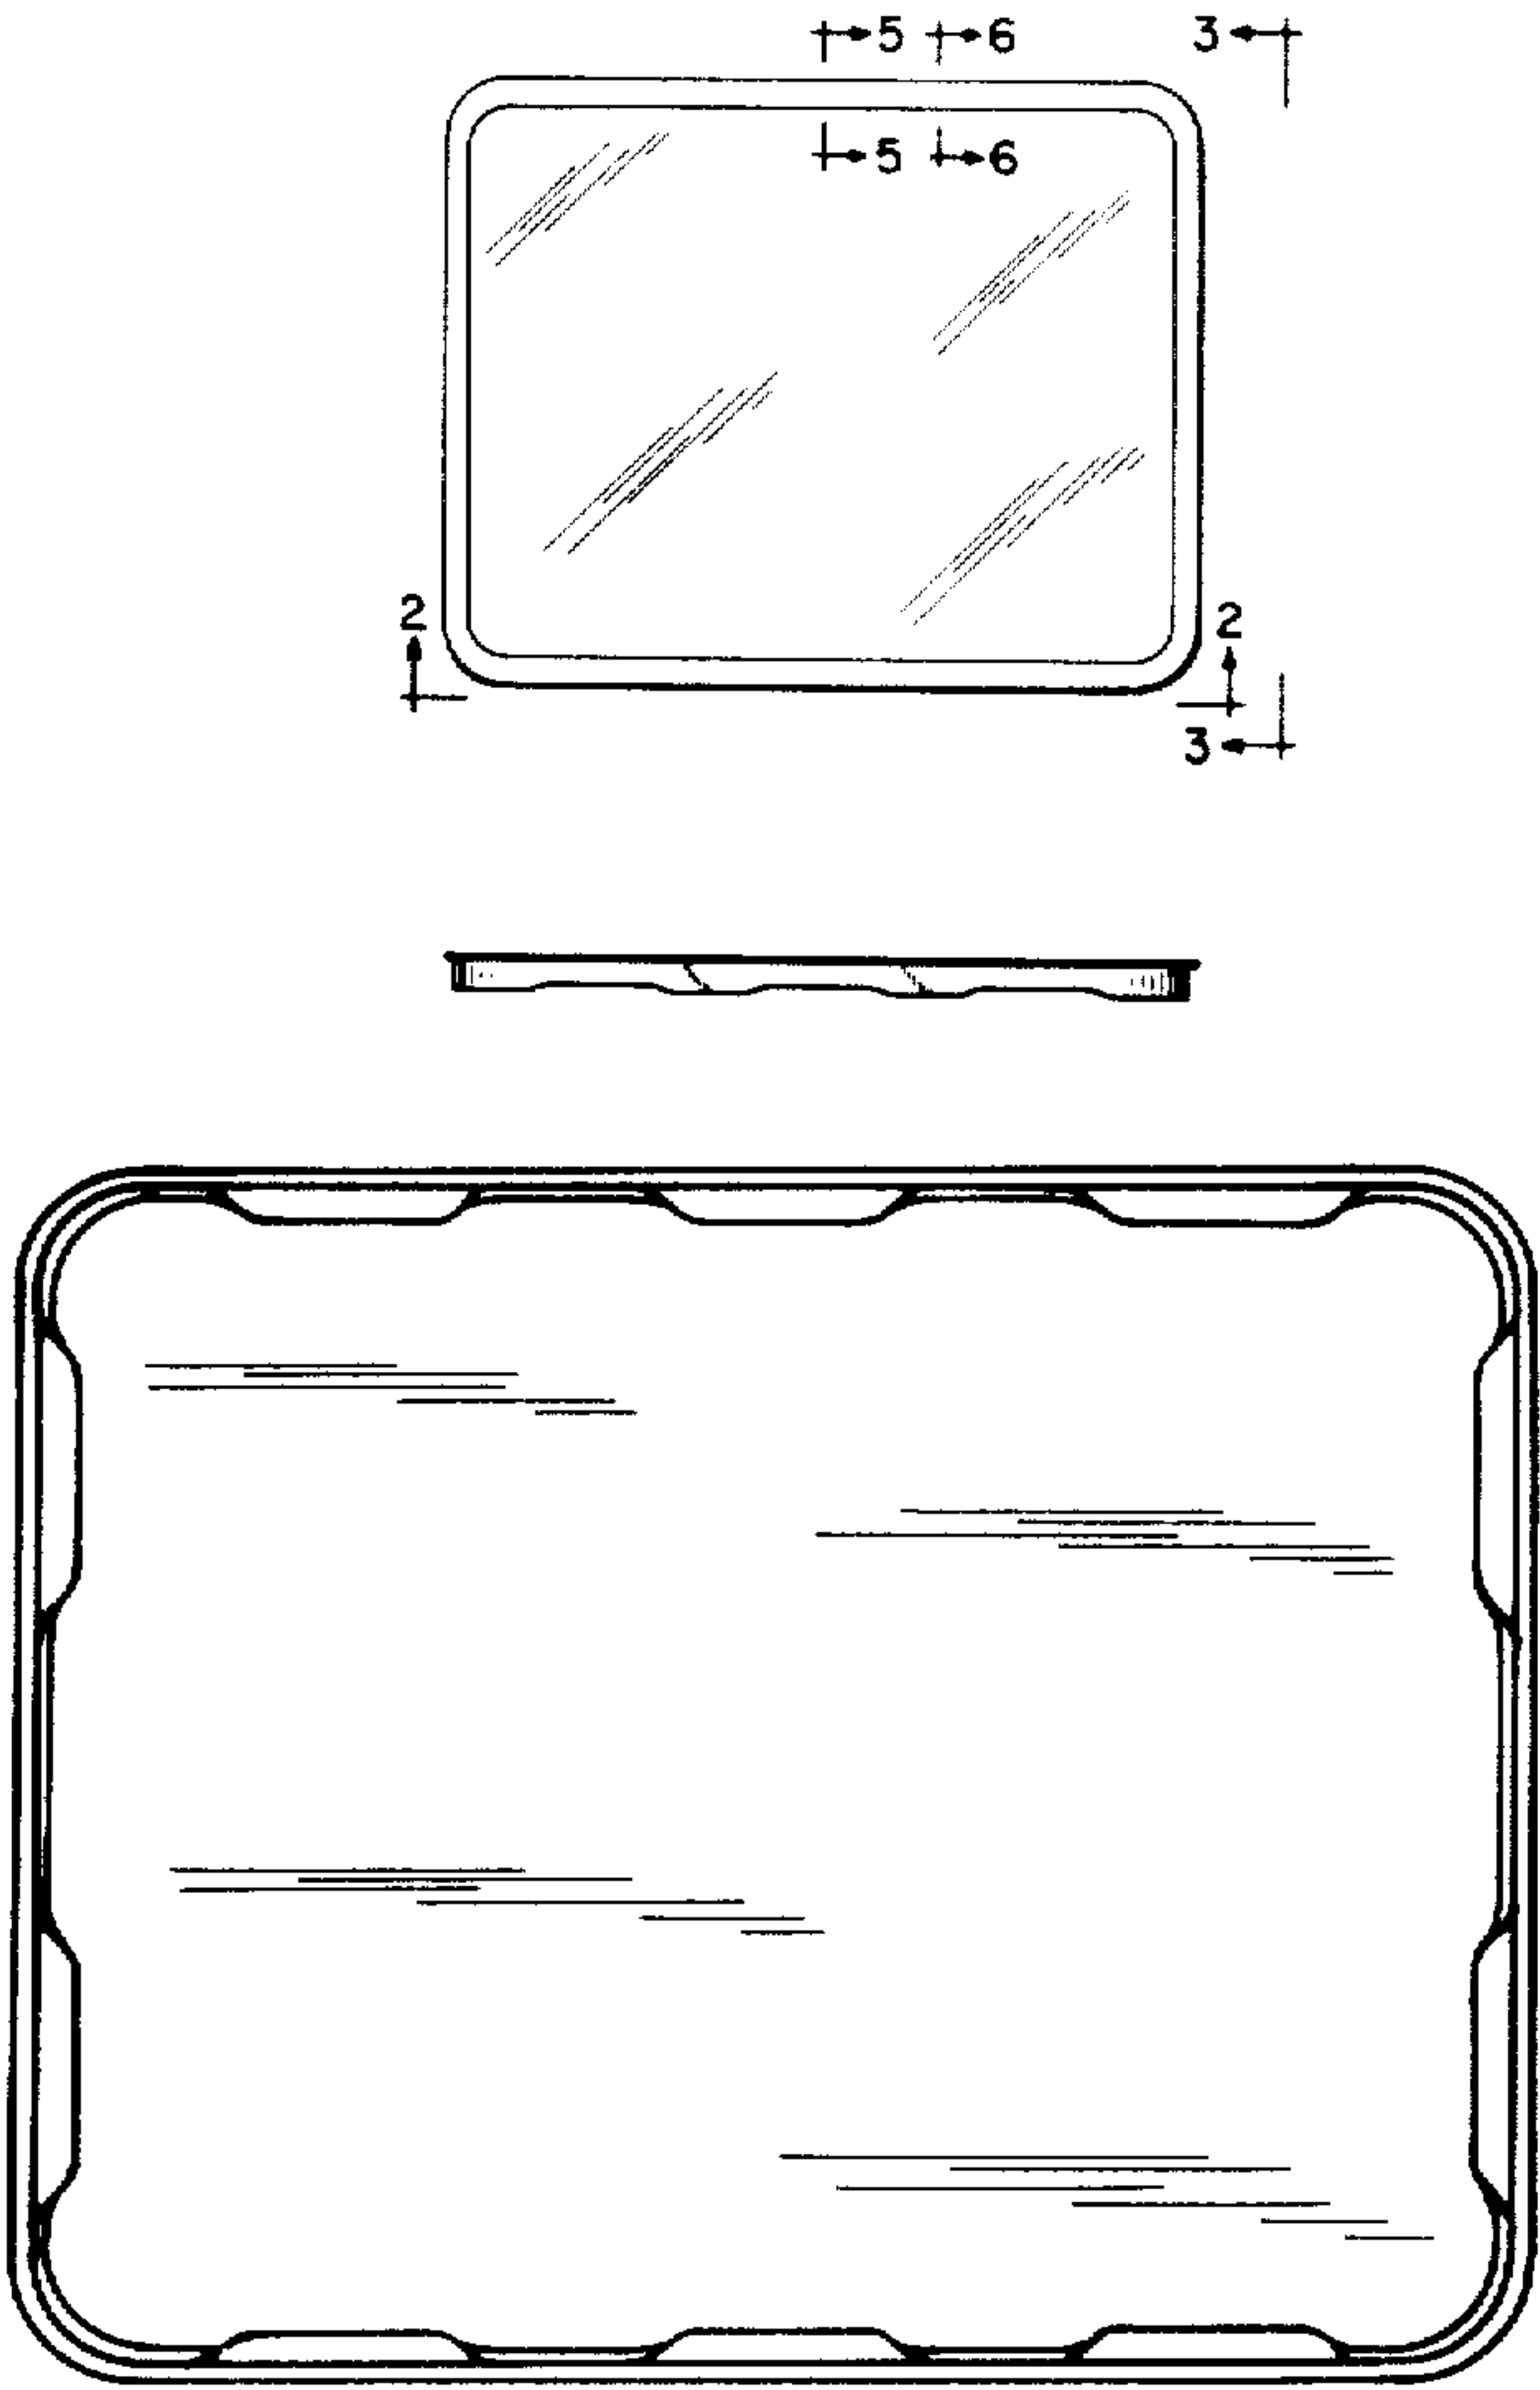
is a side elevational view thereof taken along line 2—2 of FIG. 1;
